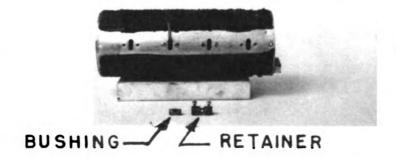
View of drum, drum slots, retainer and stabilizing bushing.
